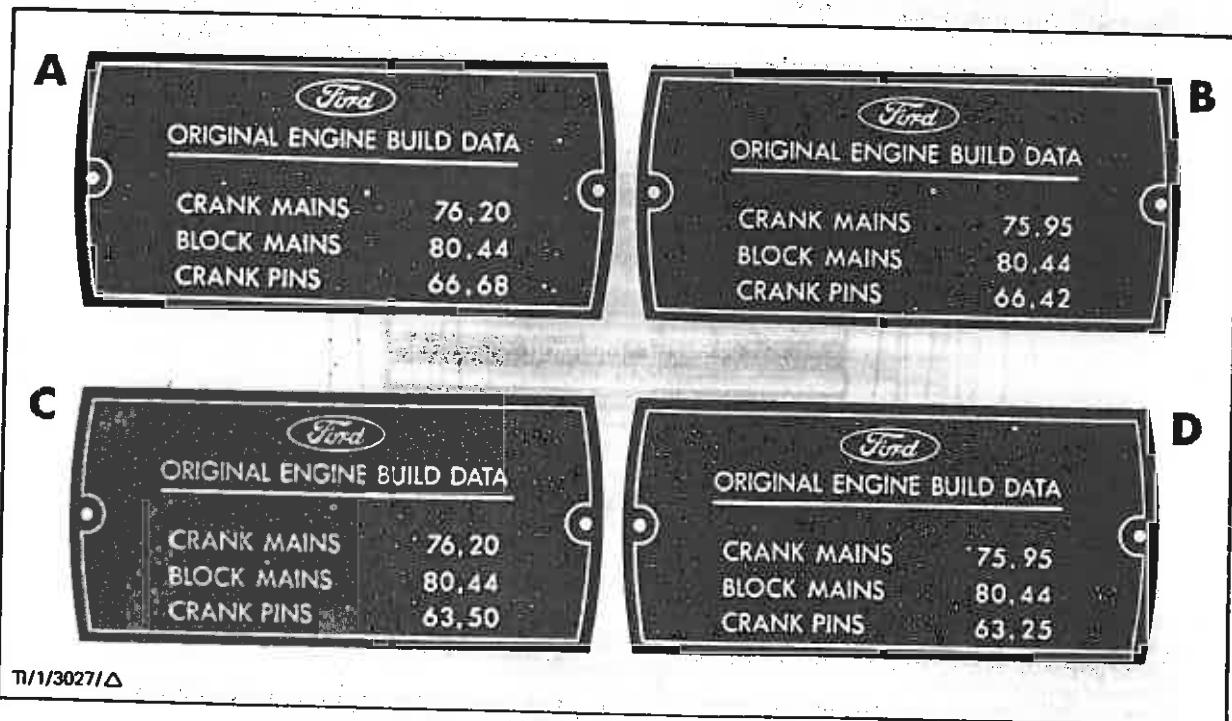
Original Engine Build Identification Plates for Engines Built Before October 1985
